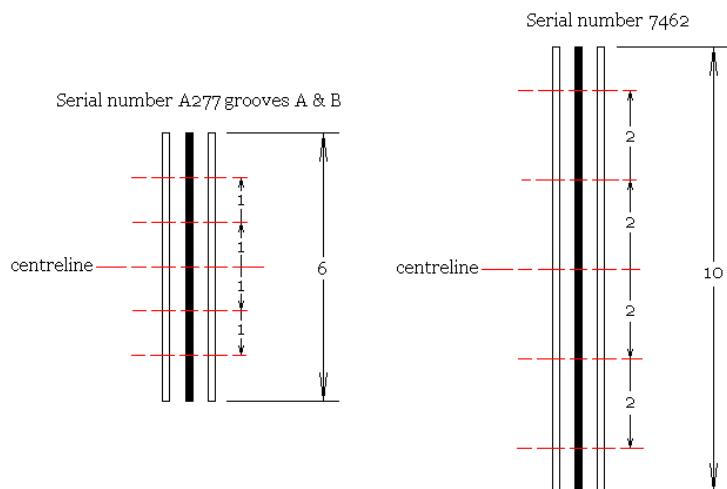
Measurement profile locations in red for the serial numbers A277 and 7462 grooves. Dimensions in mm.
